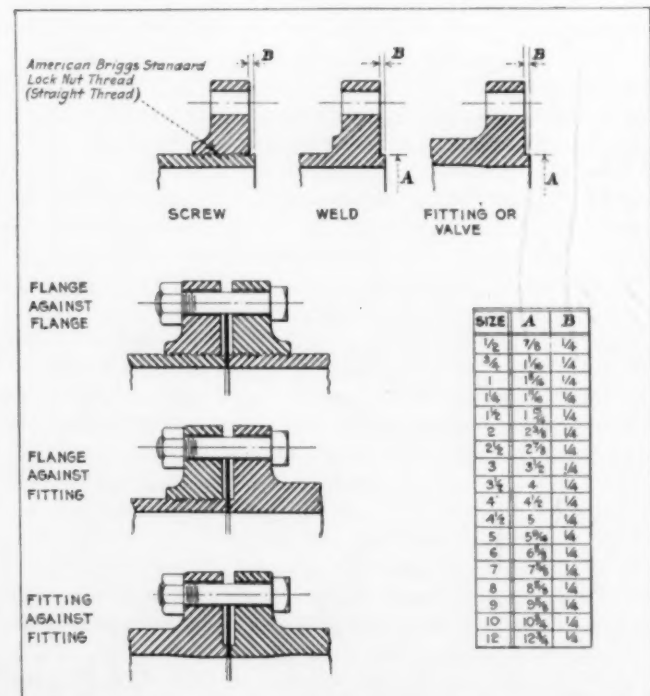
FLANGE JOINTS AND METHODS OF ATTACHING FLANGES TO PIPE, 3000-LB. HYDRAULIC AMERICAN STANDARD
